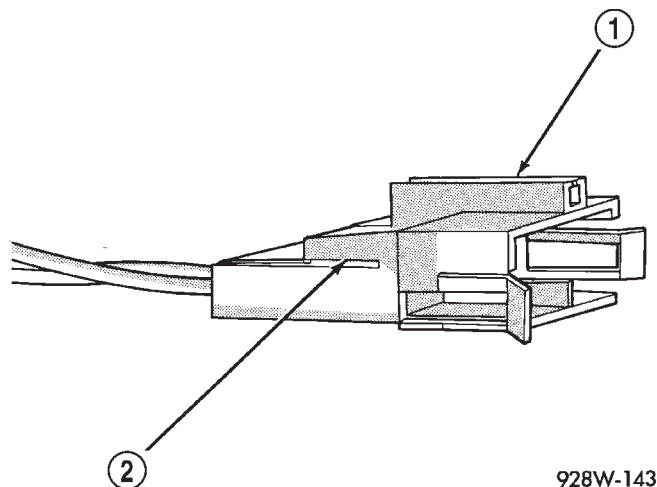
CONNECTOR LOCKING WEDGE TAB (TYPICAL)
